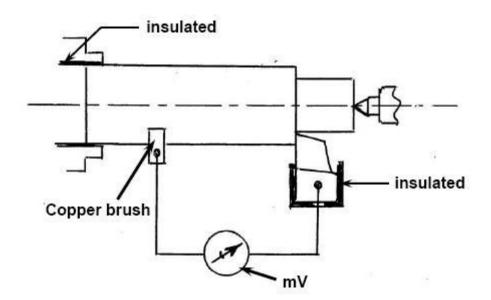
Tool-work thermocouple technique of measuring cutting temperature.
